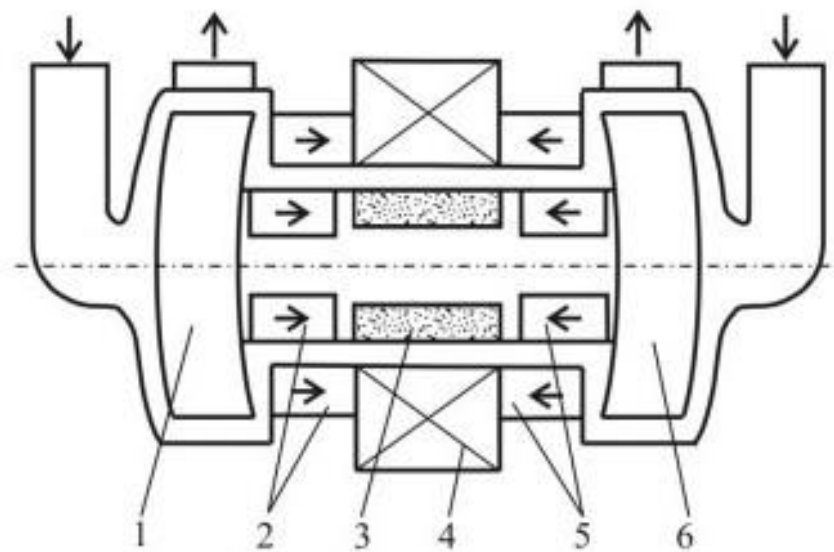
Schematic drawing of a radially driven permanent maglev centrifugal pump. 1-impeller; 2-Bearing A; 3-rotor magnets; 4-motor coil; 5-Bearing A; 6-impeller
